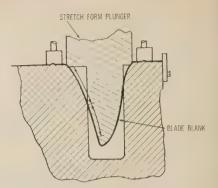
The first step in making sheet metal rotor blades is the stretch-forming of the blank to obtain upper and lower surface con-
